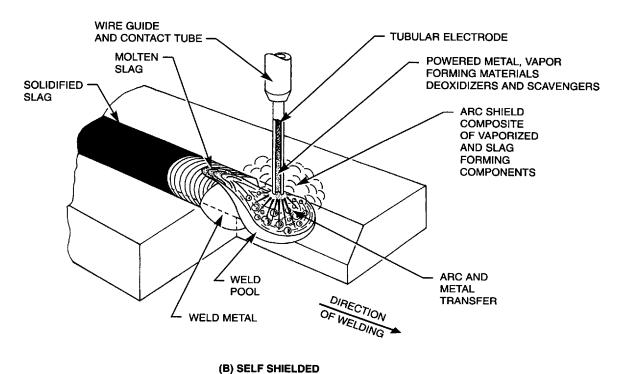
Flux Cored Arc Welding (FCAW)
